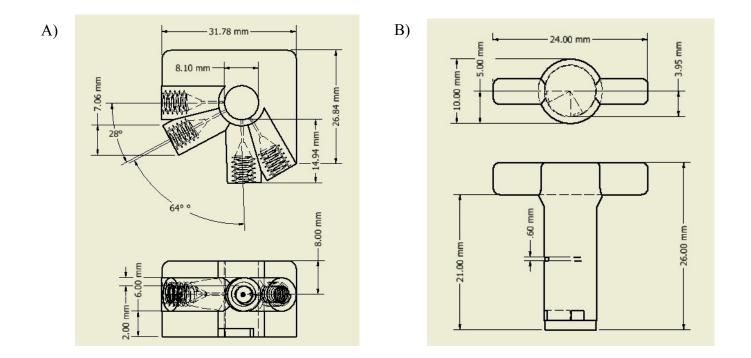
CAD drawing of 3-D printed sample injection module. (A) Sample injection module- base component. (B) Sample injection module- rotor component.
